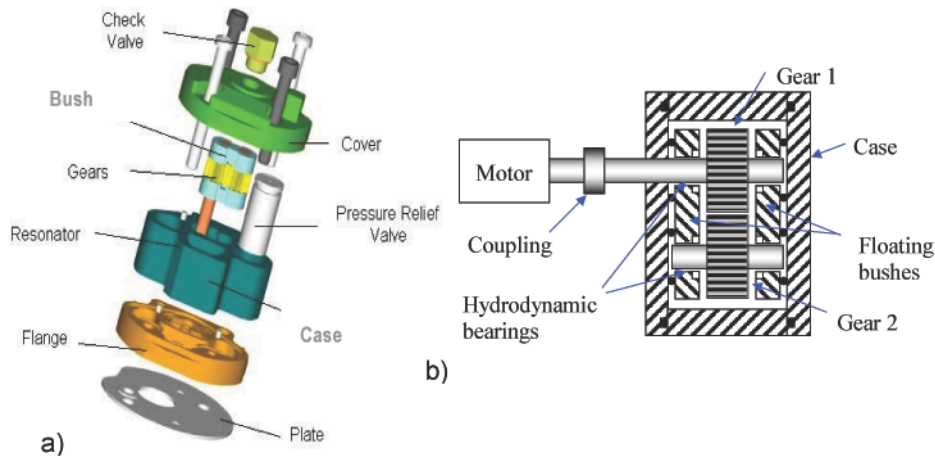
(a) Exploded drawing and (b) scheme of the gear pump.
